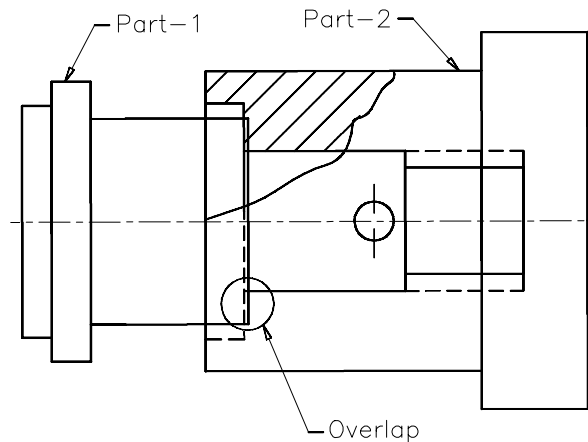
Assembly drawing after attaching Part-1 and Part-2
